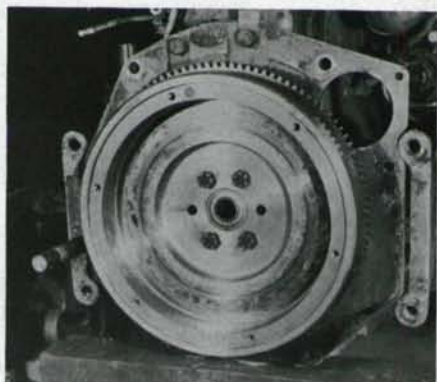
D-19 diesel and non-diesel flywheel is retained to crankshaft by four cap screws and two dowel pins. Installation of flywheel is possible in one position only.
